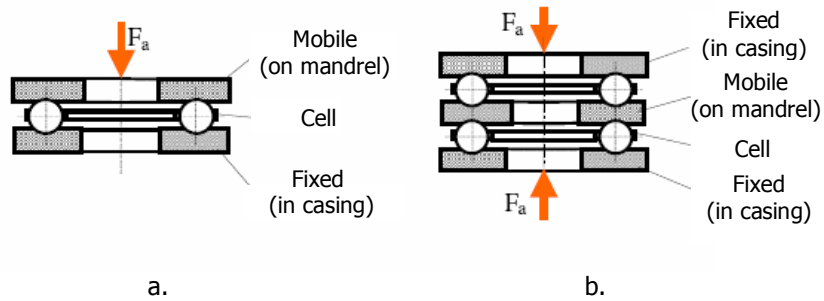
Axial ball bearing: one row (a) and two rows (b)
